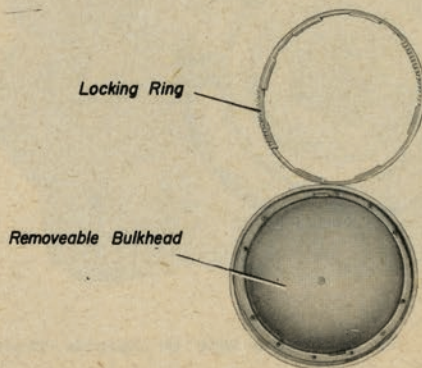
Forward End Of Airflask Showing Bayonet Locking Ring Removed
